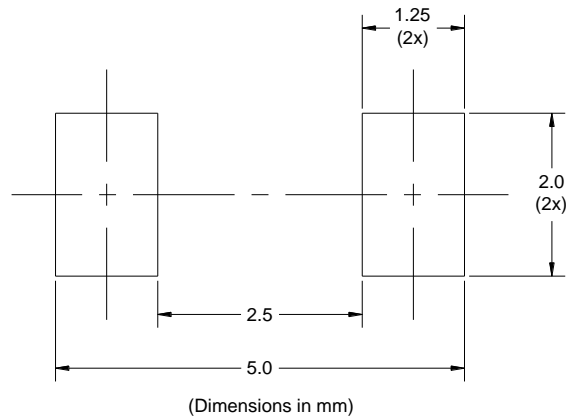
SOD-80 and SOD-123 Mounting Pad Geometry
